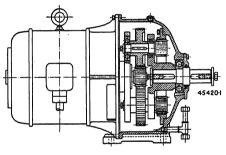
Motor gear with PB gear for speed ratios of about 1 to 12 up to 1 to 35.
